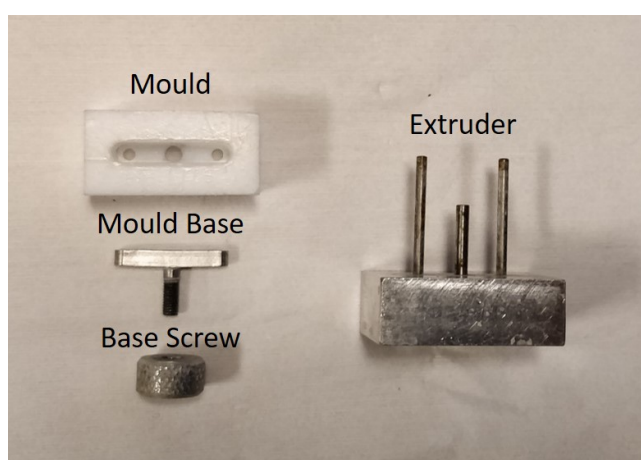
Custom made extrusion based Teflon mould. The mould assembly is shown on the left. To remove the sol-gel we use the three pronged extruder on the right.
